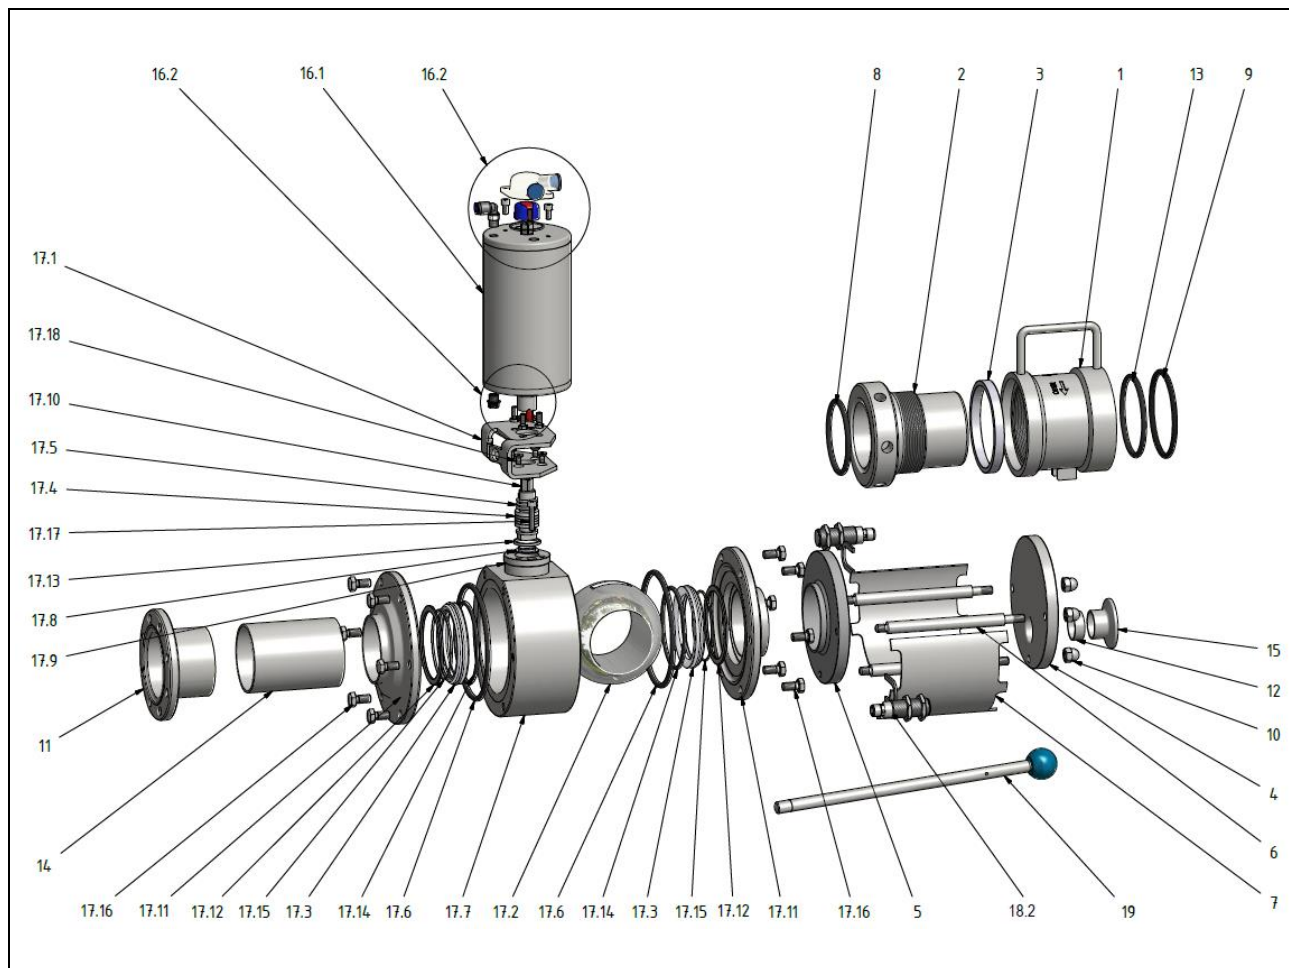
Structure of Plug-in Chamber with Ball Valve
